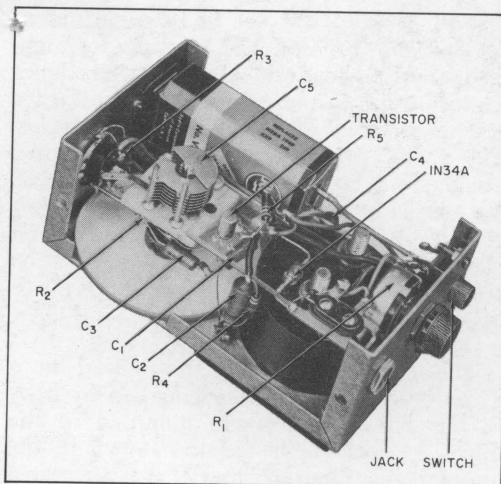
Bottom oblique left inside view of grid-dip meter showing parts layout and tuning capacitor mounting. Note cutout necessary to clear tuning dial.
